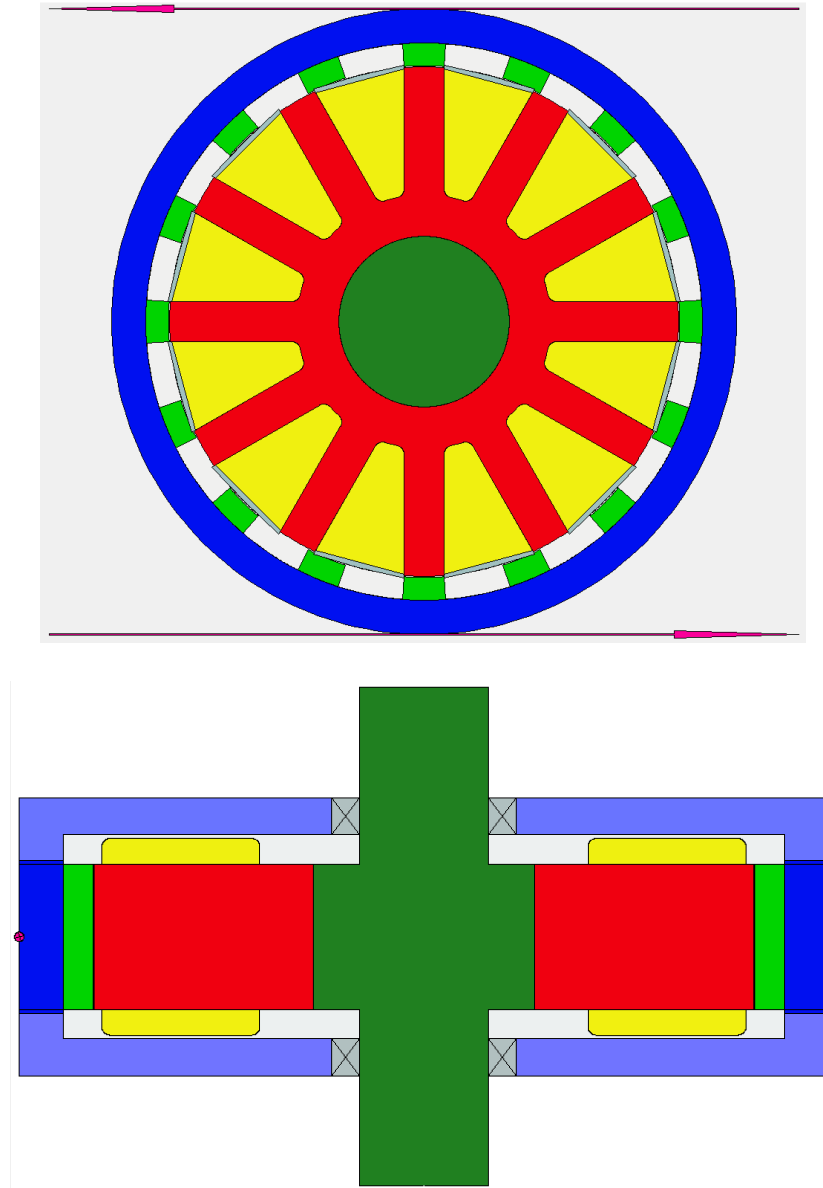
Motor geometry representation in MotorCAD: radial (top), axial (bottom)
